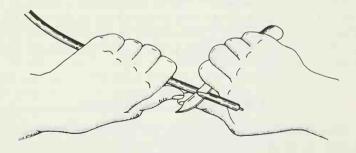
Using a knife to strip insulation from a wire. Hold the blade so that it lies flat with the wire to avoid damaging the wire.
